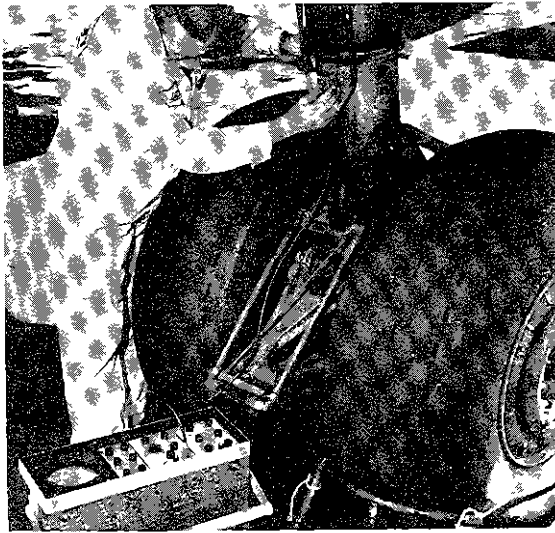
Contact Angle-Beam Test into Hidden Weld Region of a Landing Gear Oleo Strut
